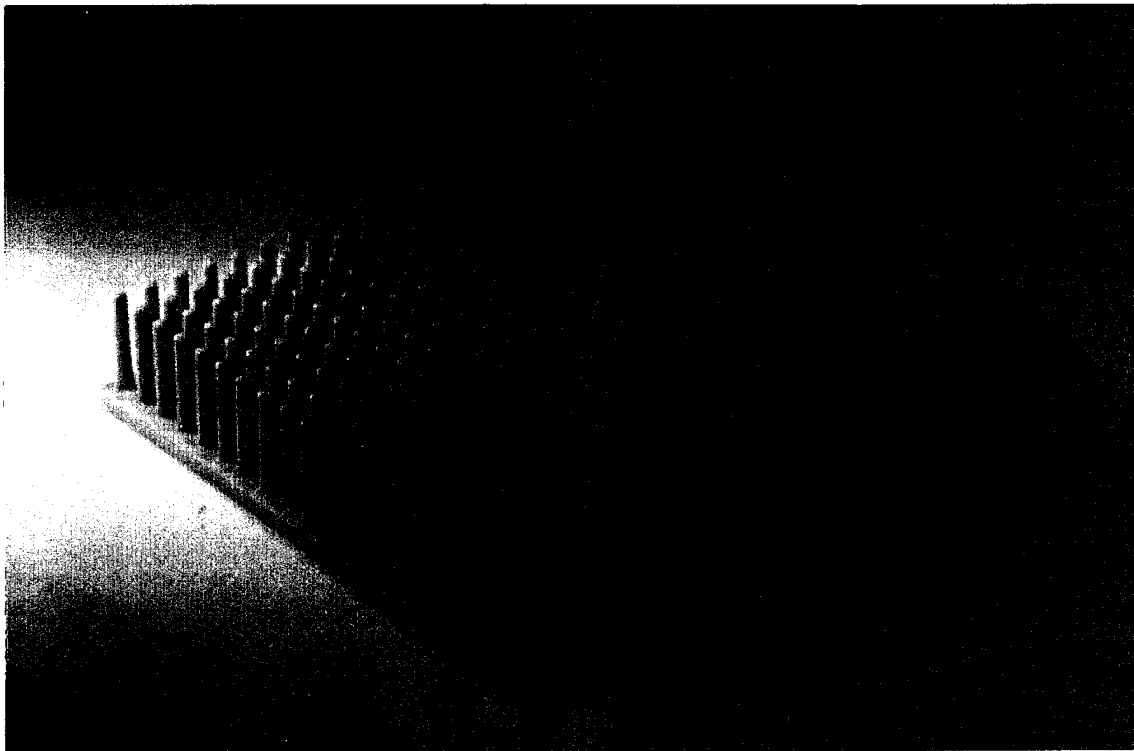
Sintered net-shape PZT preform, consisting of 361 PZT rods, each measuring 1.1 mm diameter and 7.9 mm long, on an integral base plate. More than 1400 identical injection-molded ceramic preforms were manufactured.
